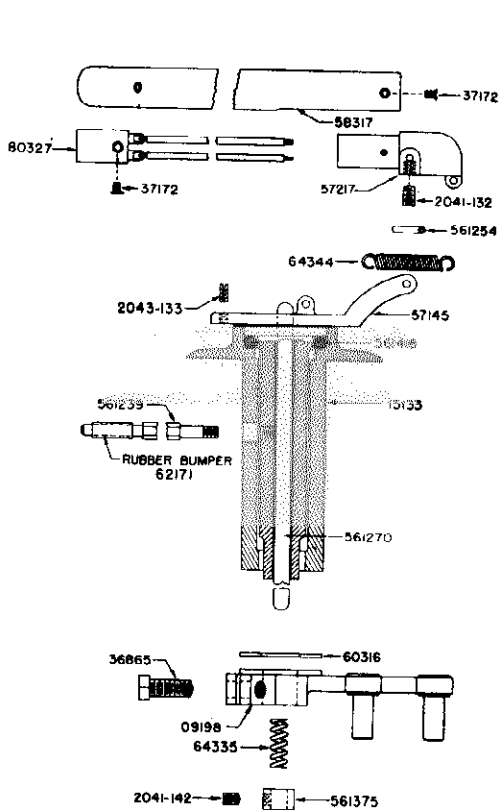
Tone arm assembly and tone arm support housing assembly.
